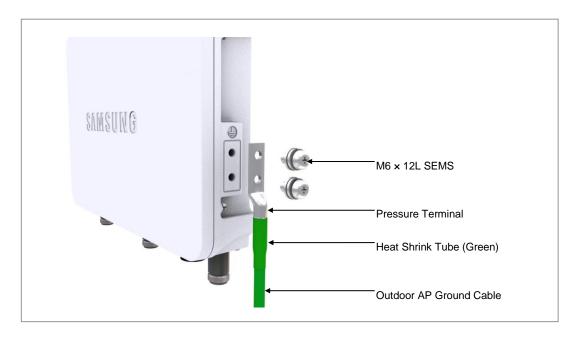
Connecting a Ground Cable to the Outdoor AP (2)
